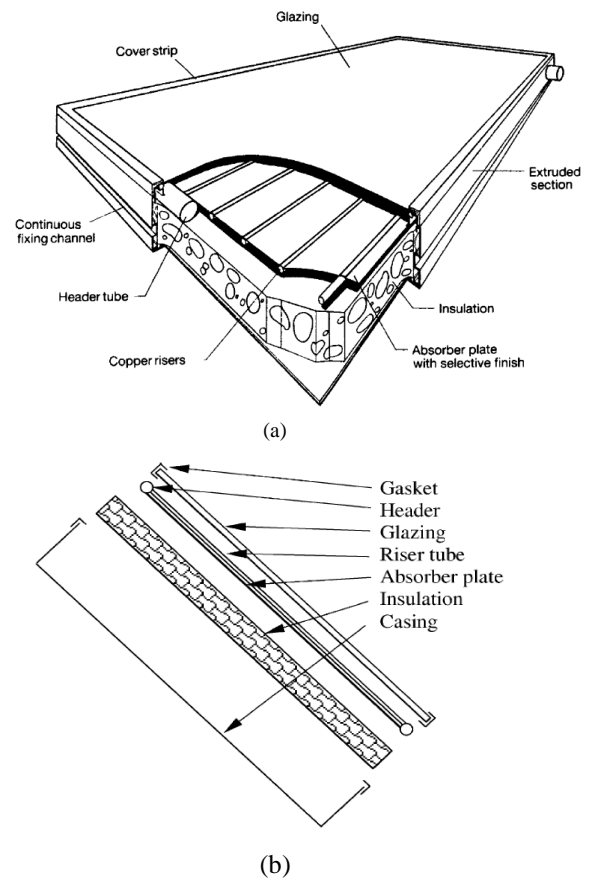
Schematic diagram of a typical flat plate collector (a) Isometric view (b) Exploded side view.
